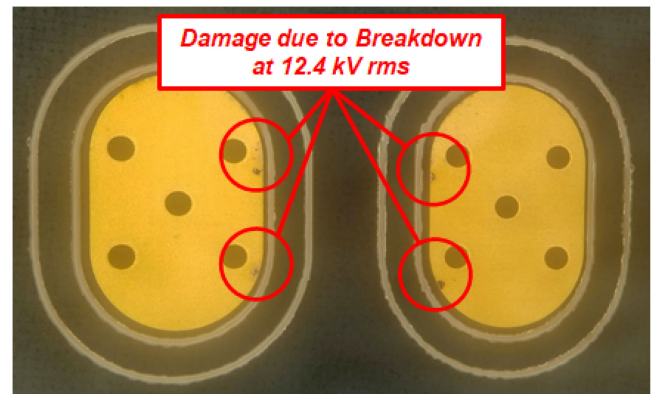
Destructive breakdown occurring on the surface of the PCB when PD tested without the PD test module attached. Breakdown occurred between the $+V_{dc}$ and $\pm V_{dc}$ pads of the busbar along critical cross section 1.
